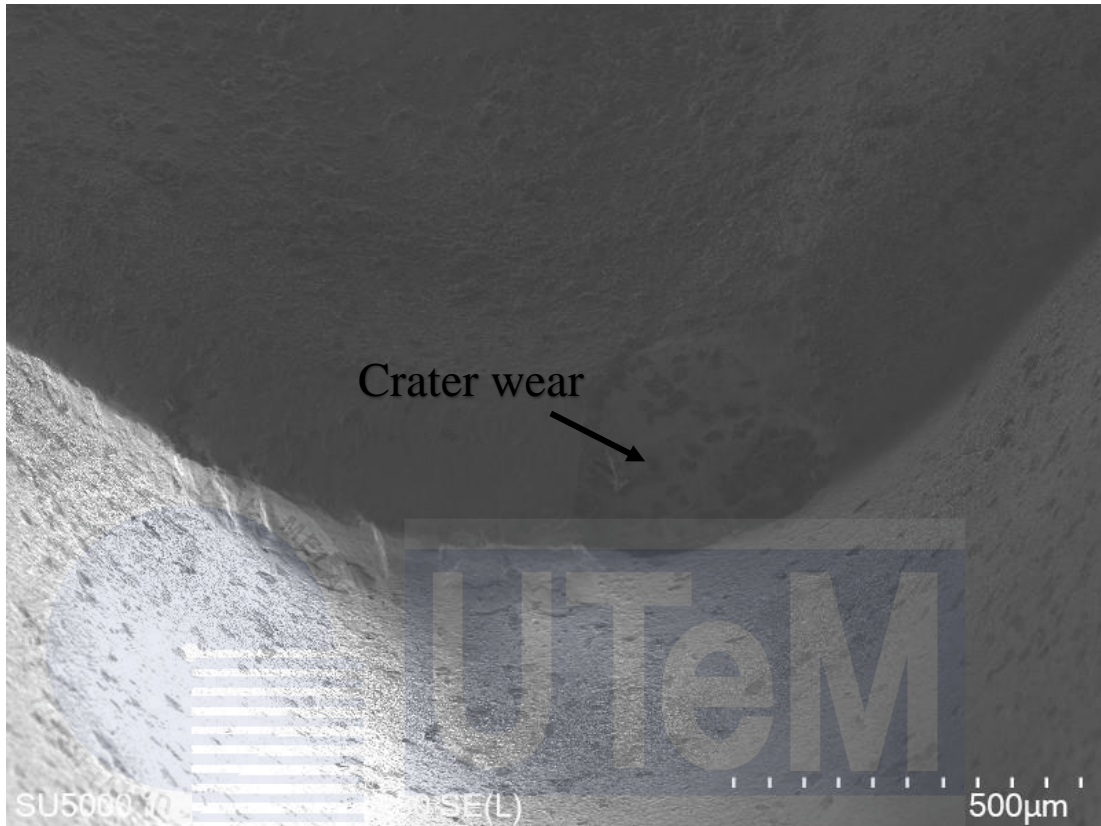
Crater wear that formed on 80° trigon carbide tool under dry condition
